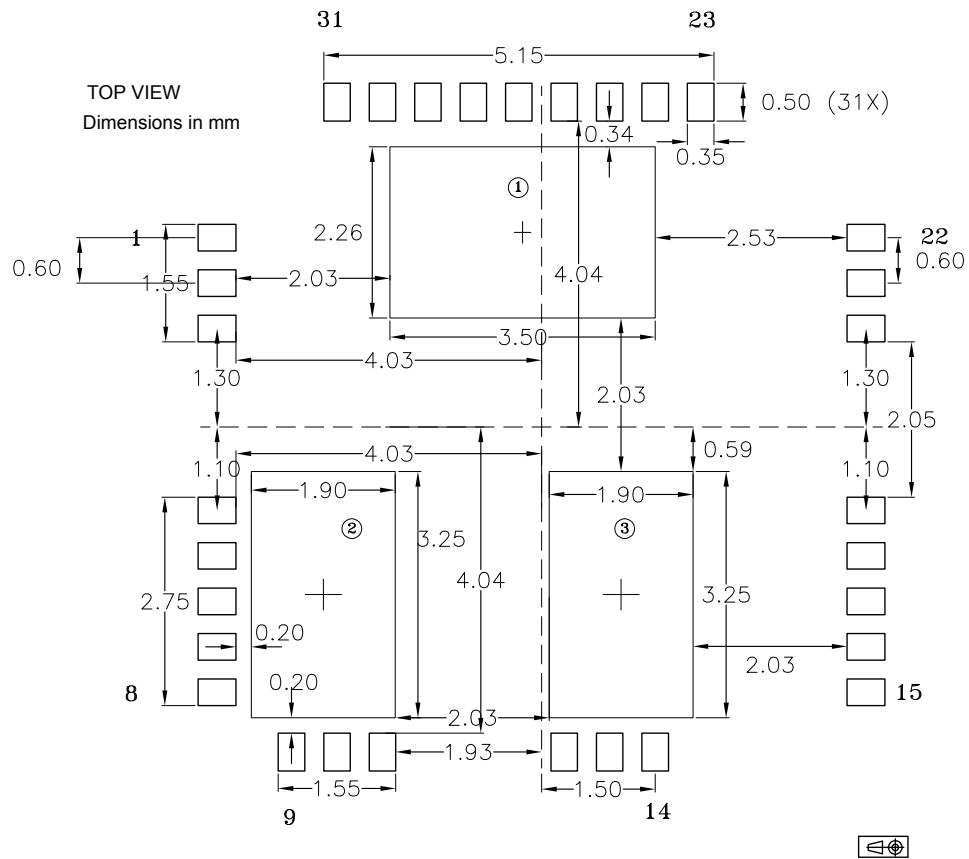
QFN 9 x 9 x 1 mm package dimensions
